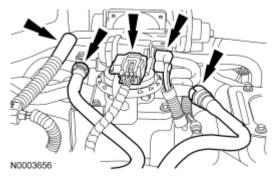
Vacuum Hoses & Electrical Connector Courtesy of FORD MOTOR CO.
